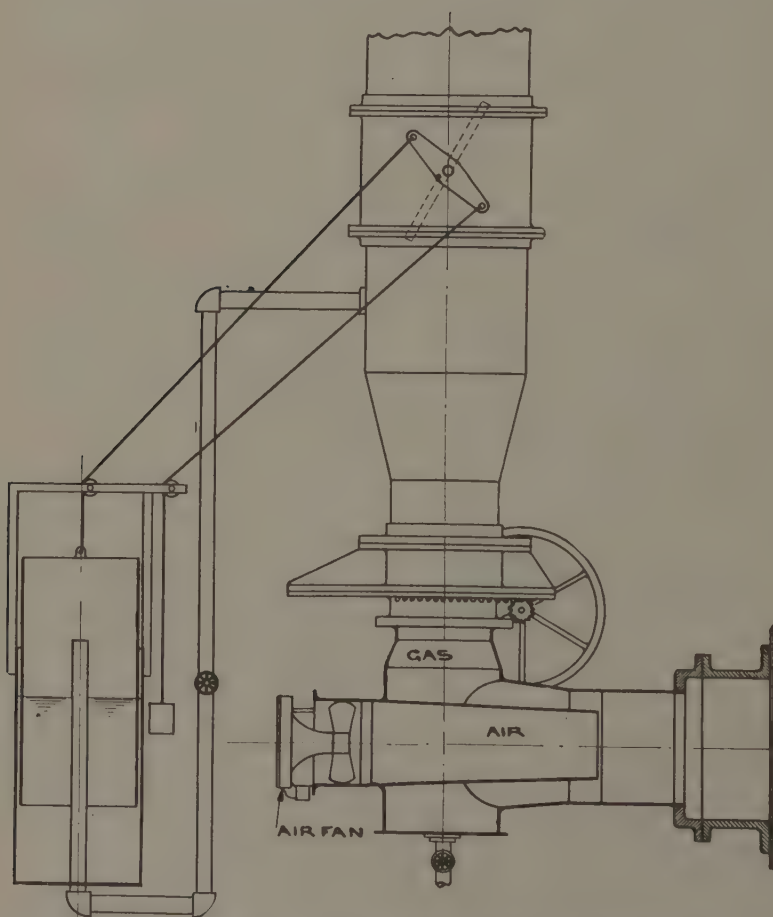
Forced draft stove burner, Central Furnaces, American Steel and Wire Company
